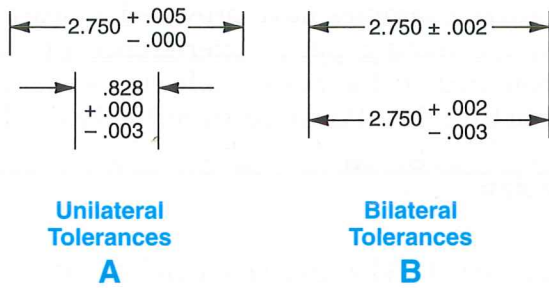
Unilateral and bilateral tolerancing. A—Unilateral tolerances vary in one direction only from the specified dimension. B—Bilateral tolerances vary in both directions from the specified dimension.
